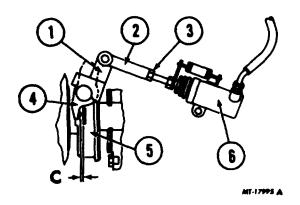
Slave Cylinder Yoke Adjustment (Pull Type Clutch)
